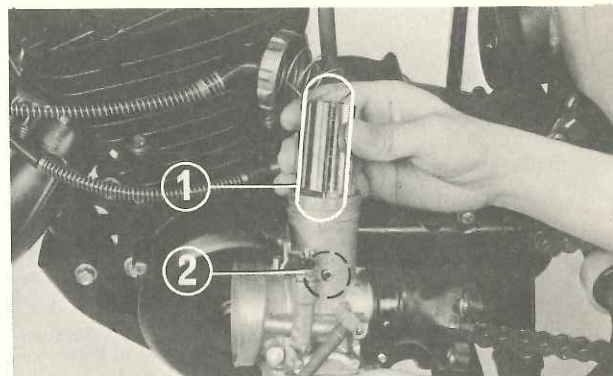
(1) Groove in throttle valve (2) Lug on carburetor side
